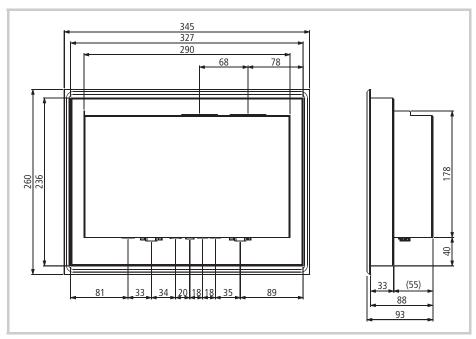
Mechanical dimensions of the 10.4" devices with standard or stainless steel front in mm
